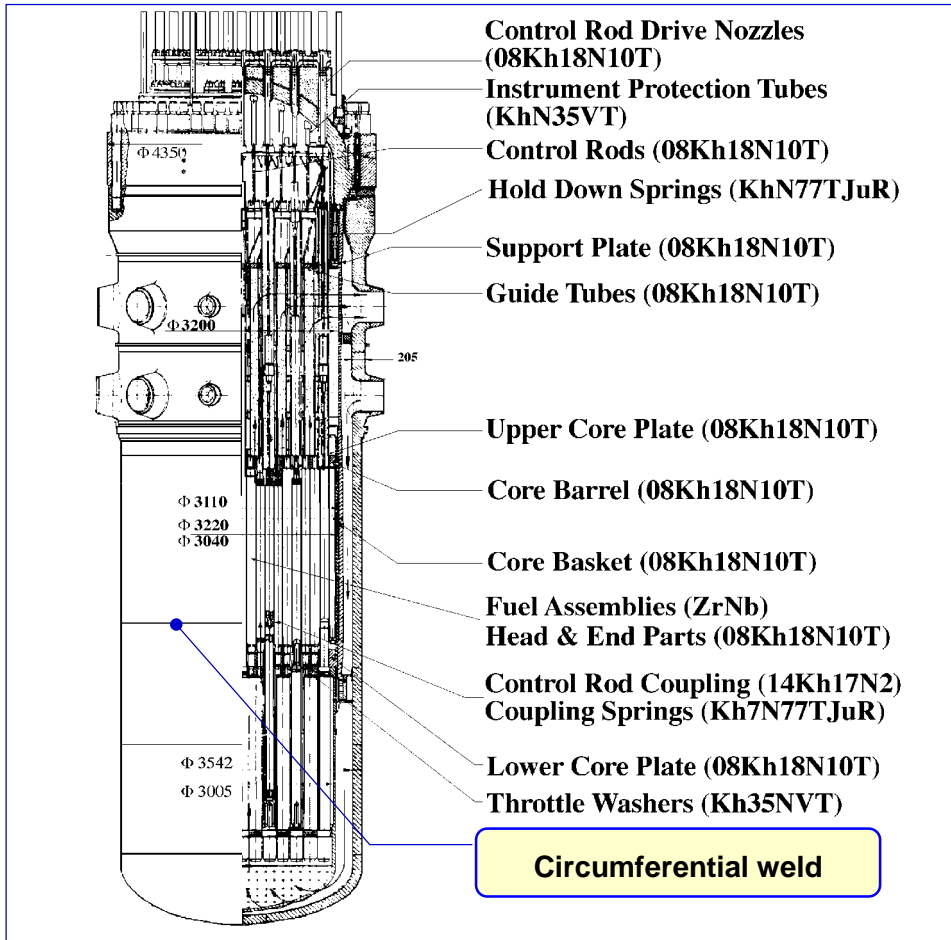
VVER 440 Reactor pressure vessel and location of the critical weld.
